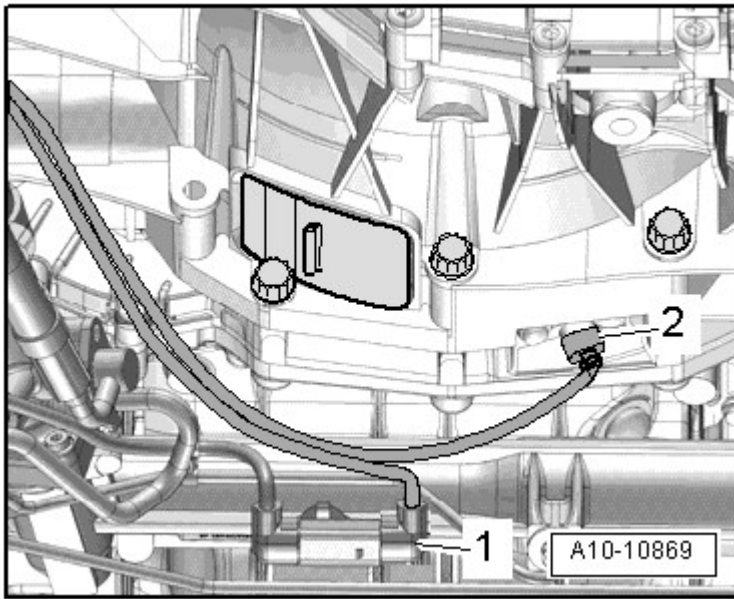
Disconnecting Connector From Servotronic Solenoid Valve
